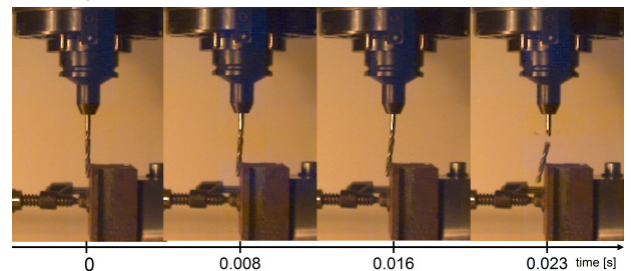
Collision of a drill tool at a feed speed of 10 m/min.
